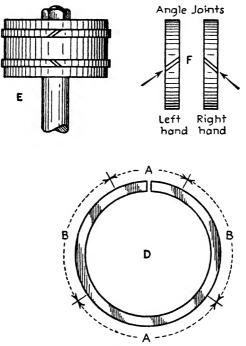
One-cut rings leak at B. (Courtesy of Power.)
